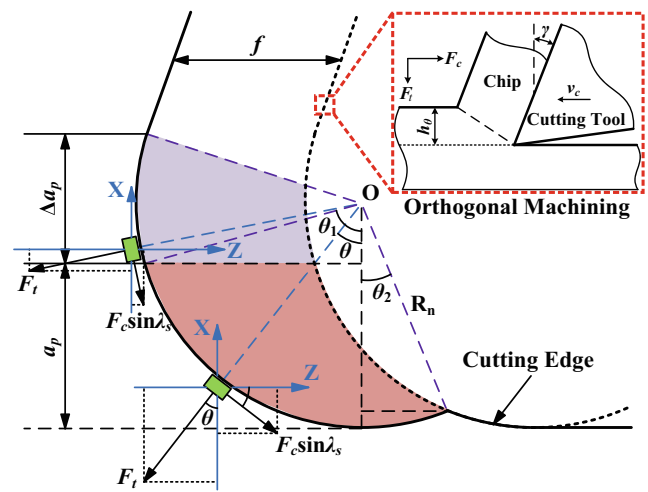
Cutting force mechanism on the cross section view of undeformed chip
